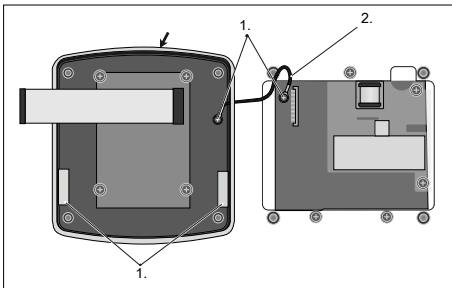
Fitting the profile seal on the lower part of the controller housing
